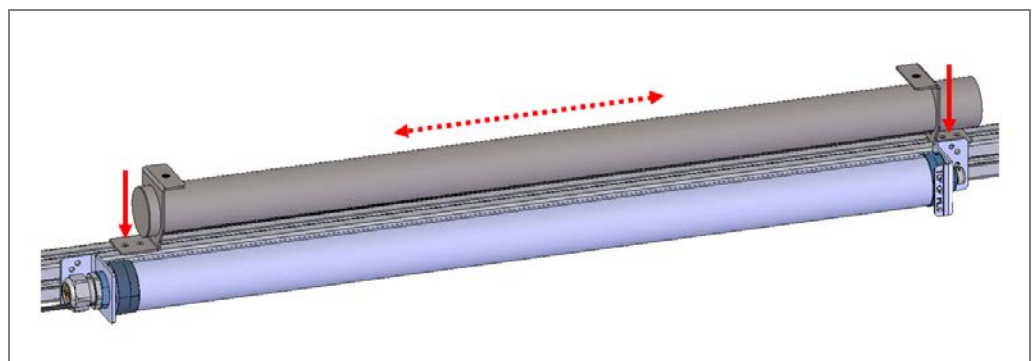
Vent duct: attaching and aligning on the mounting frame
